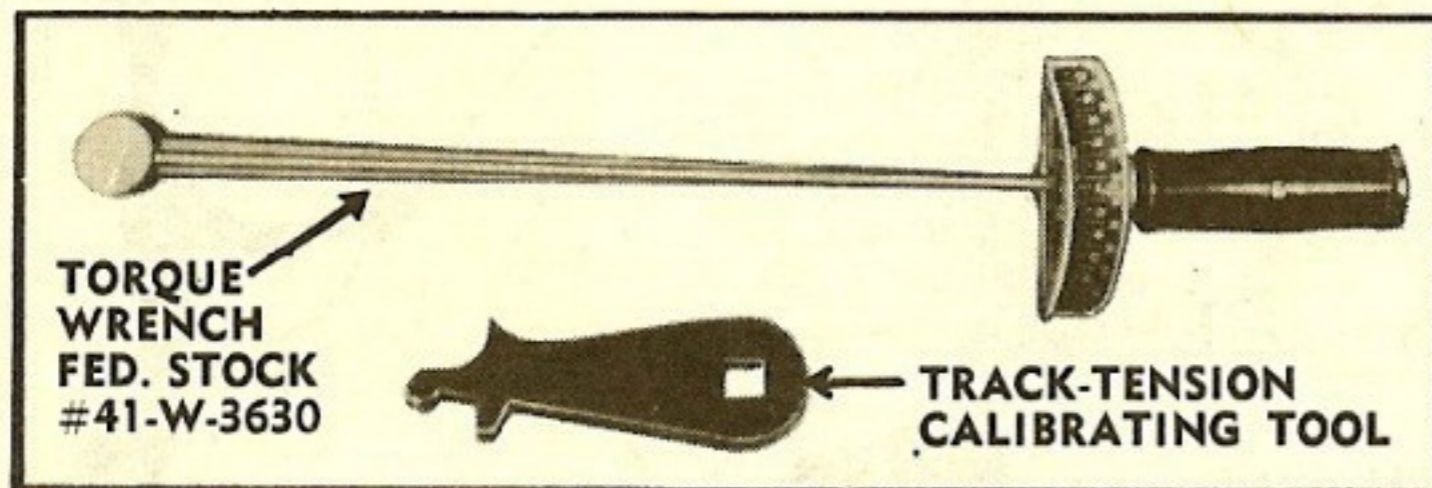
Checking track-tension is made easy with this new tool—used with torque wrench (2nd echelon and higher).
